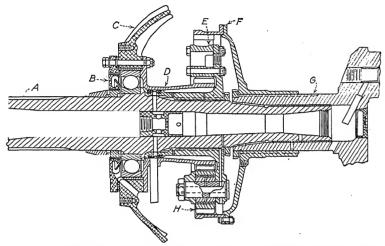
Arrangement of the Pratt and Whitney type planetary reduction gear. (A) Propeller shaft; (B) thrust-bearing assembly; (C) nose of crankcase; (D) fixed gear bolted to crankcase; (E) pinion cage splined to propeller shaft; (F) internal tooth-drive gear splined to crankshaft; (G) crankshaft; (H) planetary pinion.
